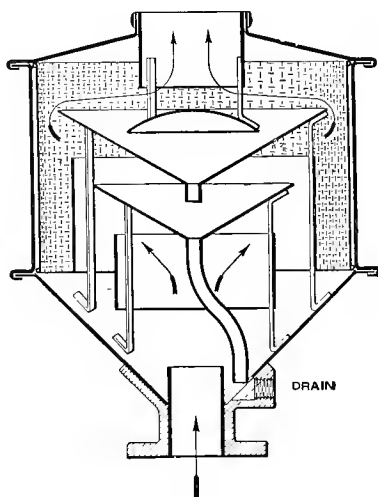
EXHAUST HEAD (HOLDEN & BROOKE).
